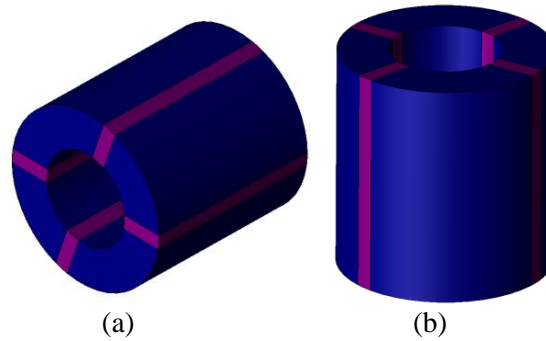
Pole Pairing rotor model a) Isometric view b) Rotor top view
